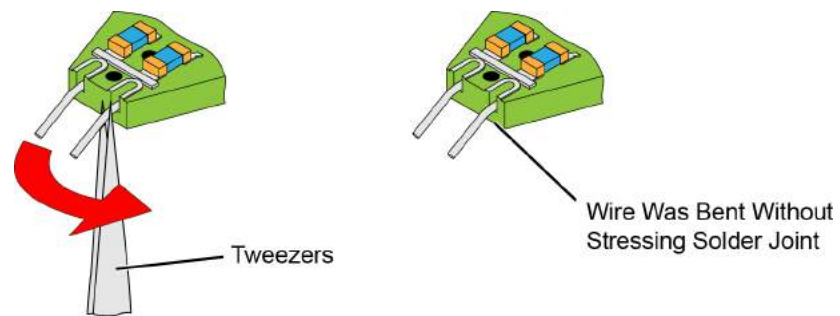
Adjusting Spacing Without Stressing Solder Joint
